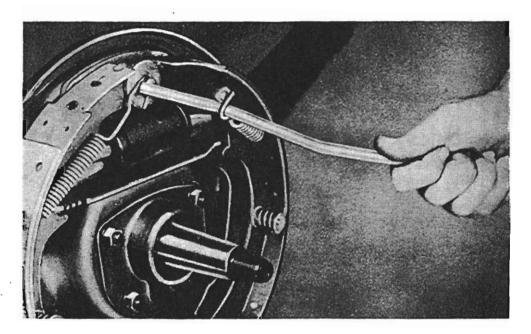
Tool KMO-526 Also Is Used to Install Brake Shoe Retracting Springs.
